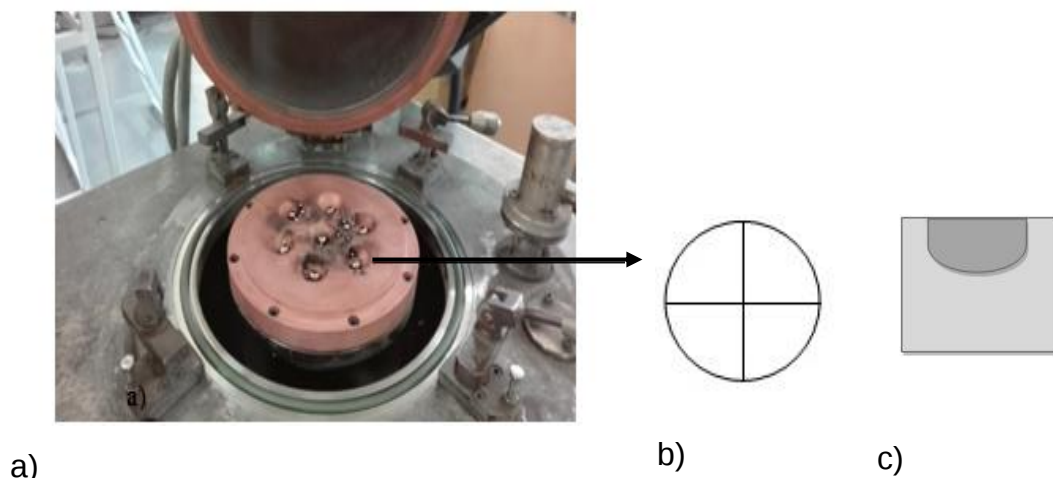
(a) The copper hearth for compact vacuum arc melting system, (b) schematic of spherical button weld and (c) cross sectional view of mounted sample.
